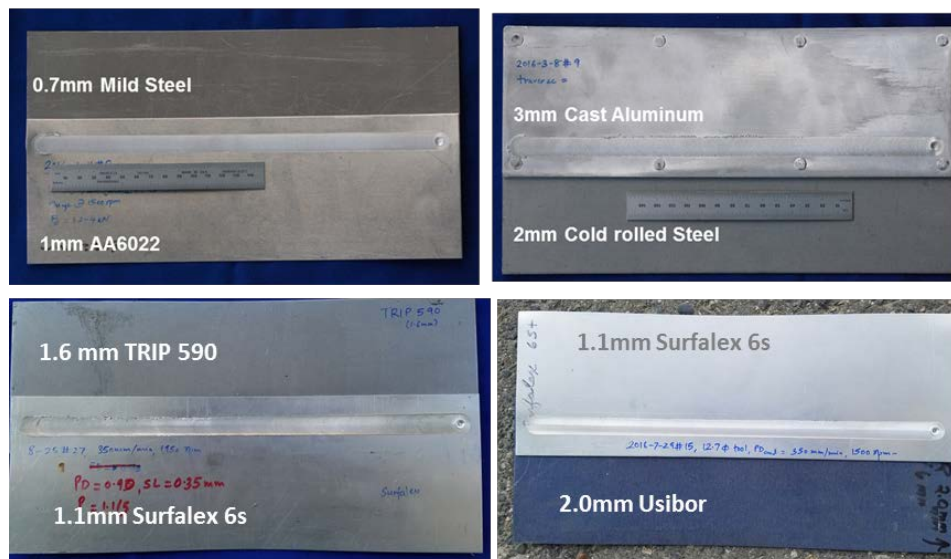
Representative Al-steel welded panels produced using the FSS technique.
